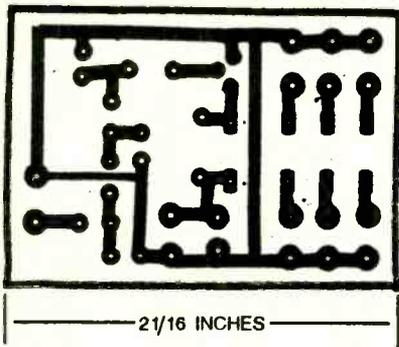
The Scanner Silencer's was assembled on a small printed-circuit board, measuring about $2\frac{1}{16}$ by $1\frac{7}{16}$ inches. A full-size template of its printed-circuit board is shown here.
